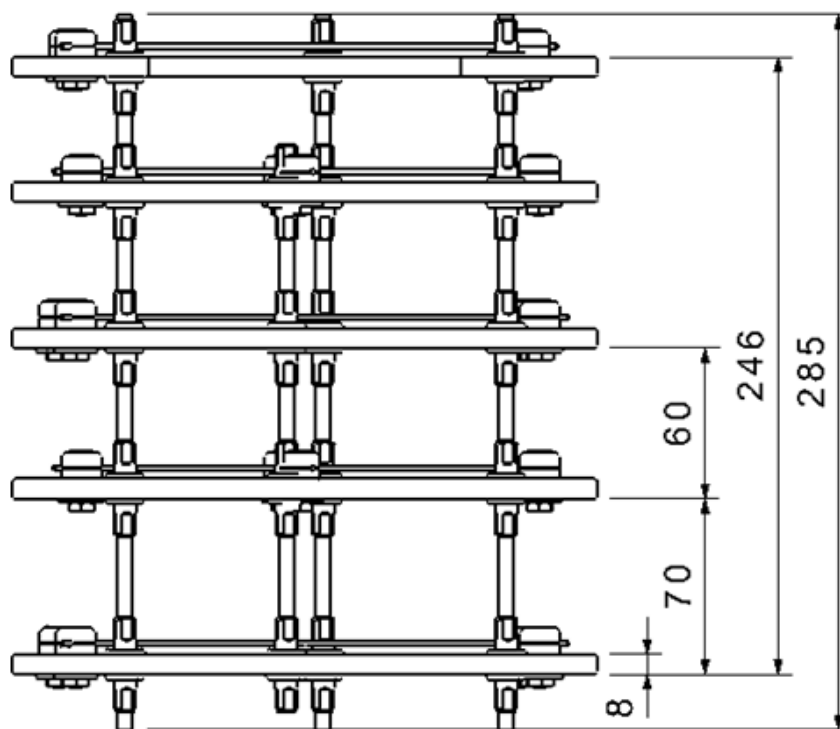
The main dimensions of the 3<sup>rd</sup> concept of fixator – front view
